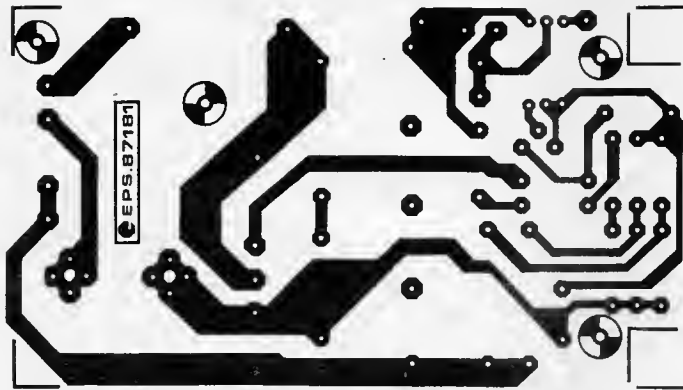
Track layout and component mounting plan for the dimmer PCB.
